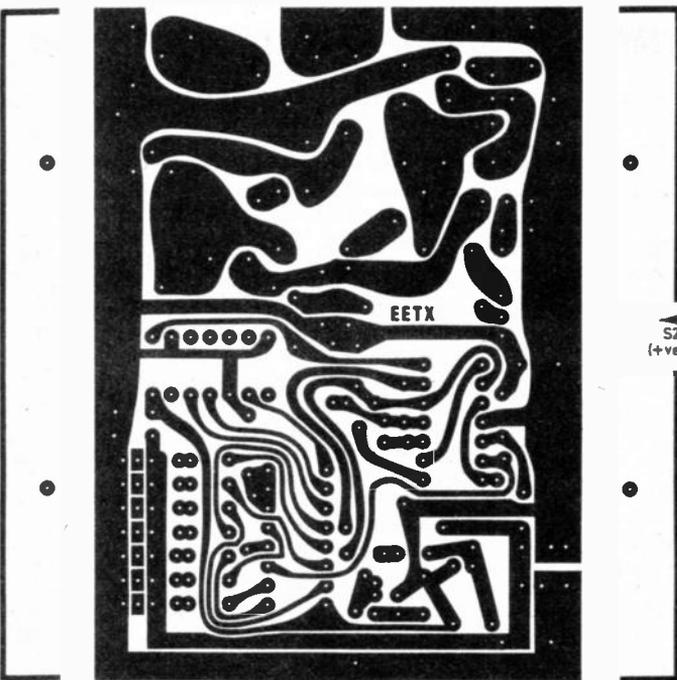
Printed circuit board for the EE Radio Control Transmitter. This is actual size. Note the fixing holes on the outer "plain" or completely etched areas.
